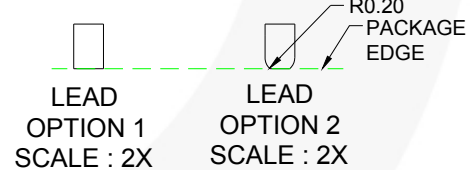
16-Lead, Ultrathin Molded Leadless Package (UMLP)
